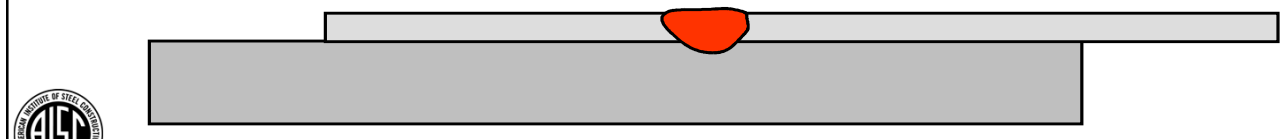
Arc Spot Welds (see 4.2.4)
